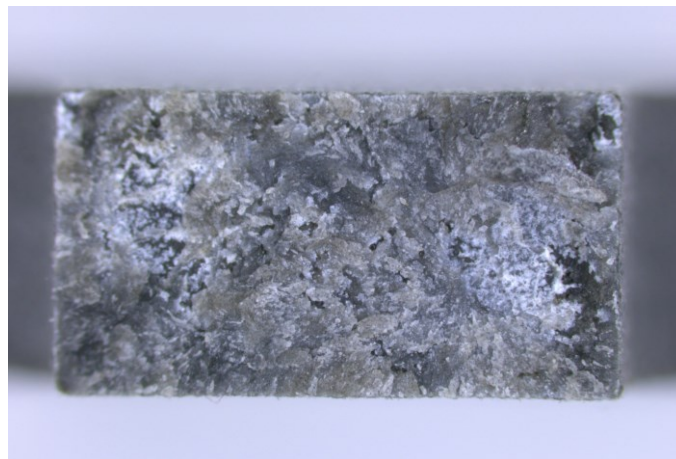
Breaking section of a unaged specimen printed in direction Z
